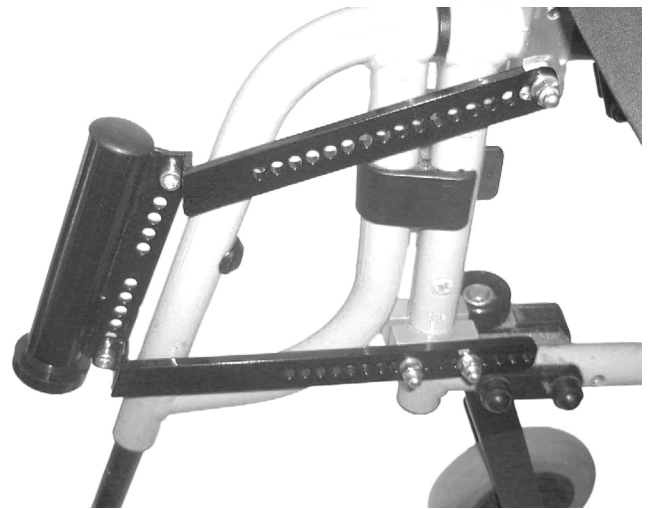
Mounted general adapter if a stable clamp connection is not possible due to removable footrests.
